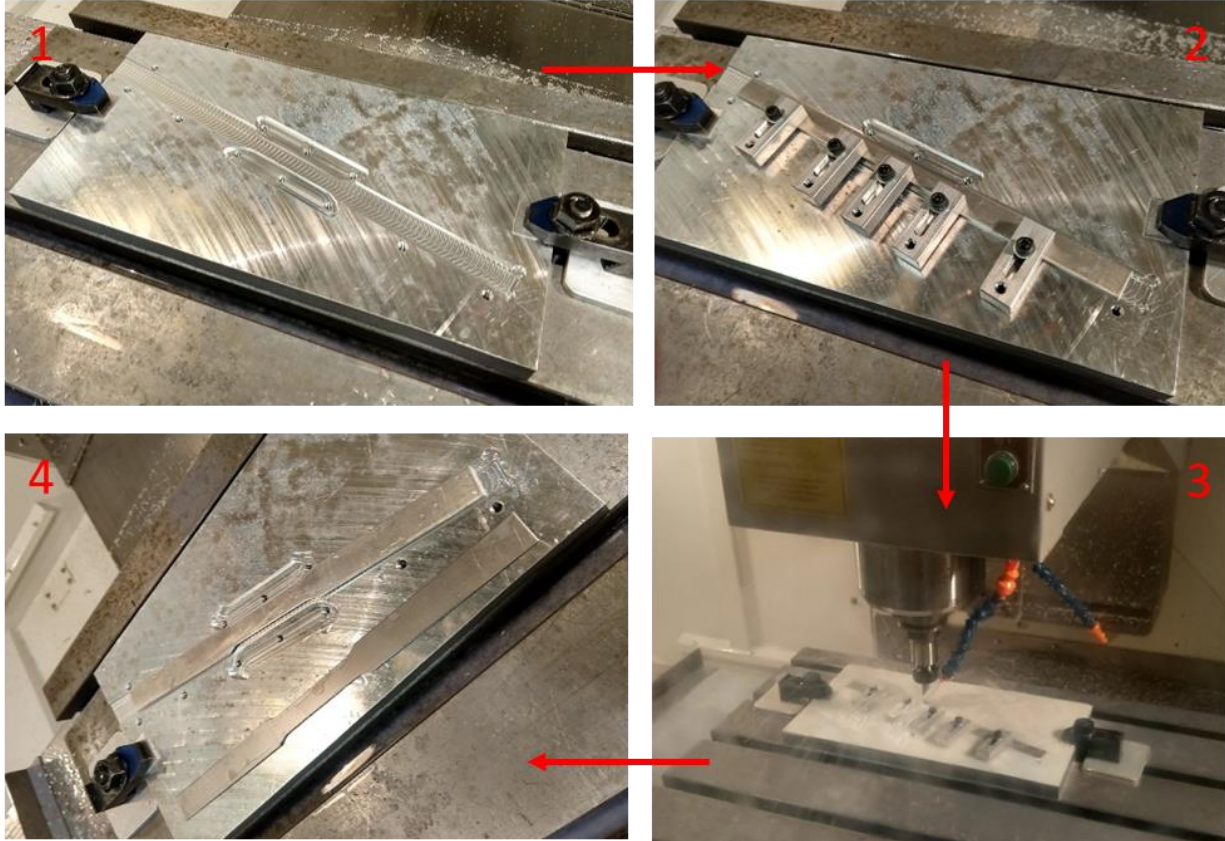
Process for machining the test specimen (clockwise from top left)
